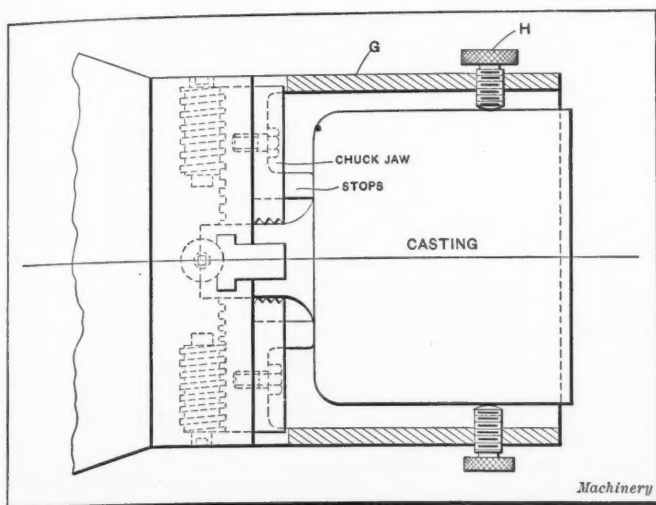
Detail of the Chuck and Method of holding Fan Motor Bodies in the Two-spindle Jones & Lamson Flat Turret Lathe
